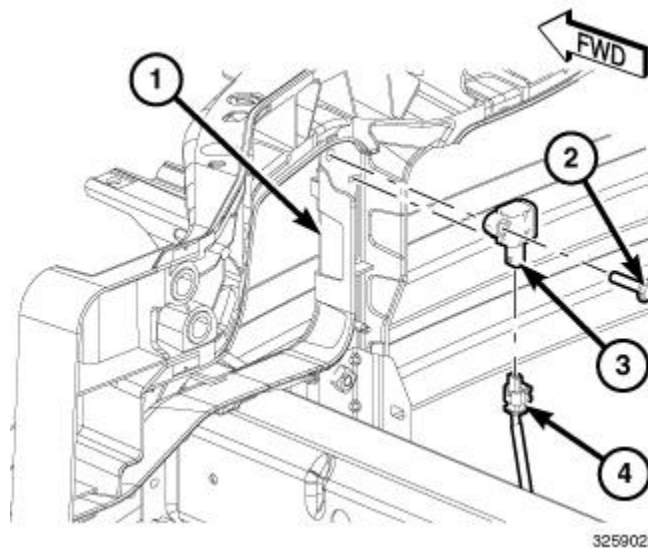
Front End Module (FEM) Structural Support, Wire Harness Connector, Screw & Left Front Impact Sensor
